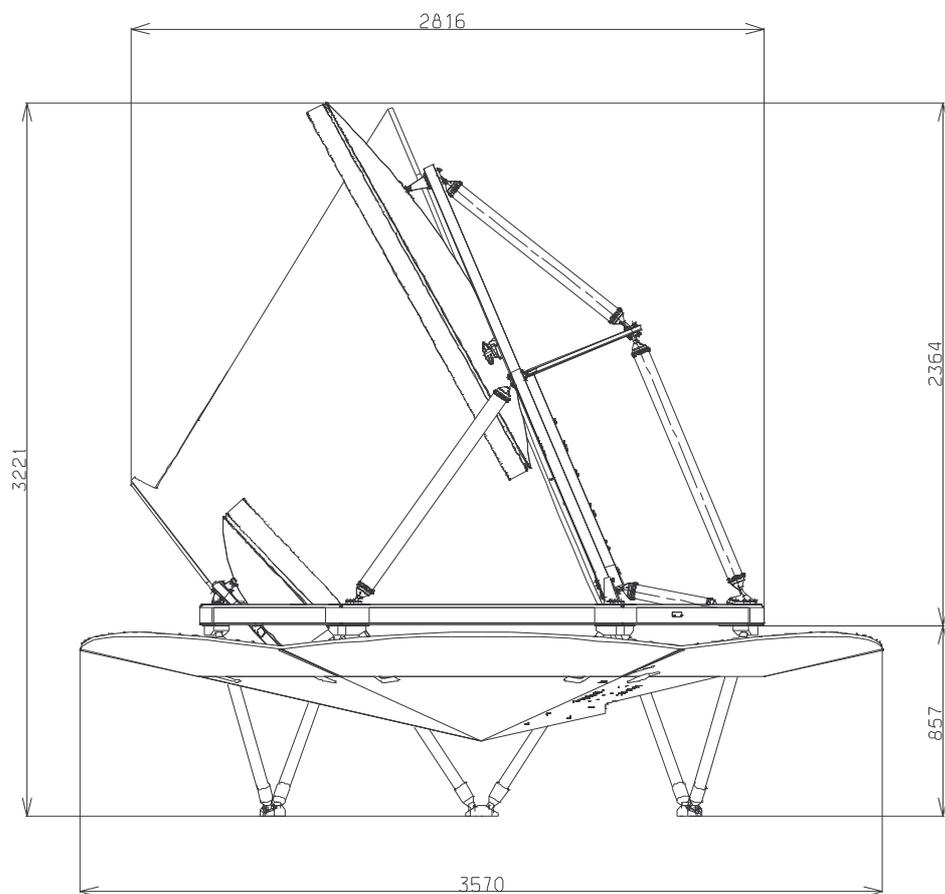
RFQM (test focal plane not shown) overall dimensions in mm.
